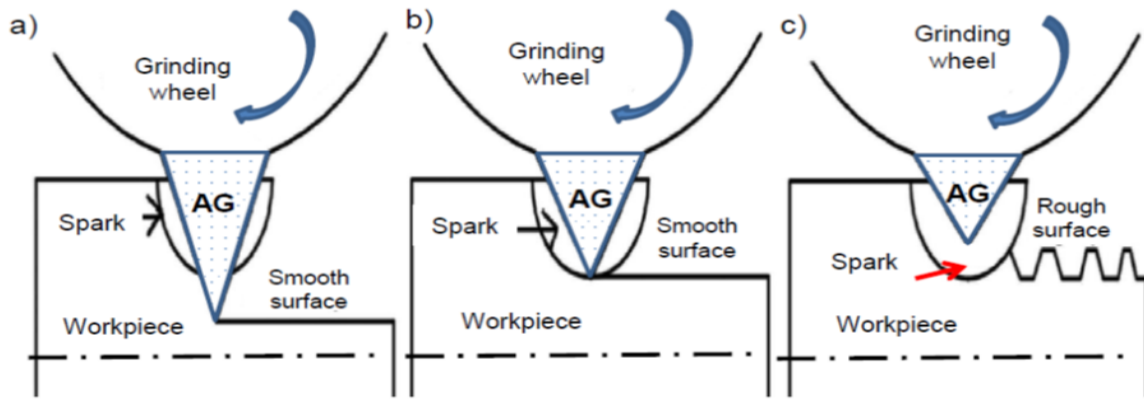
Mechanism of material removal in AEDG process schemes of various variants of electro-discharge grinding process: a) the machining depth is higher than depth of discharge craters; b) machining depth is equal to depth of discharge craters; c) machining depth is lower than depth of discharge craters. Symbol: AG – abrasive grain
